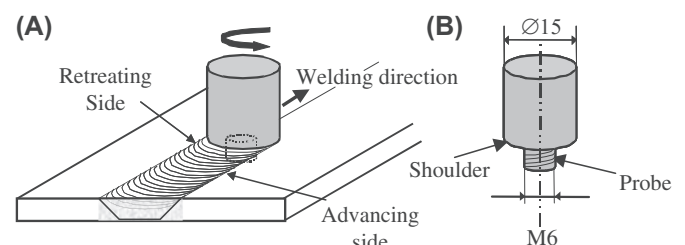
Friction stir welding and tool (example for 5-mm thick plate).
